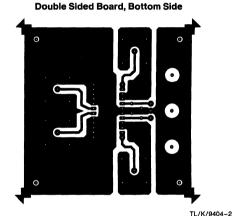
LH4266, Recommended Printed Circuit Board Layout
